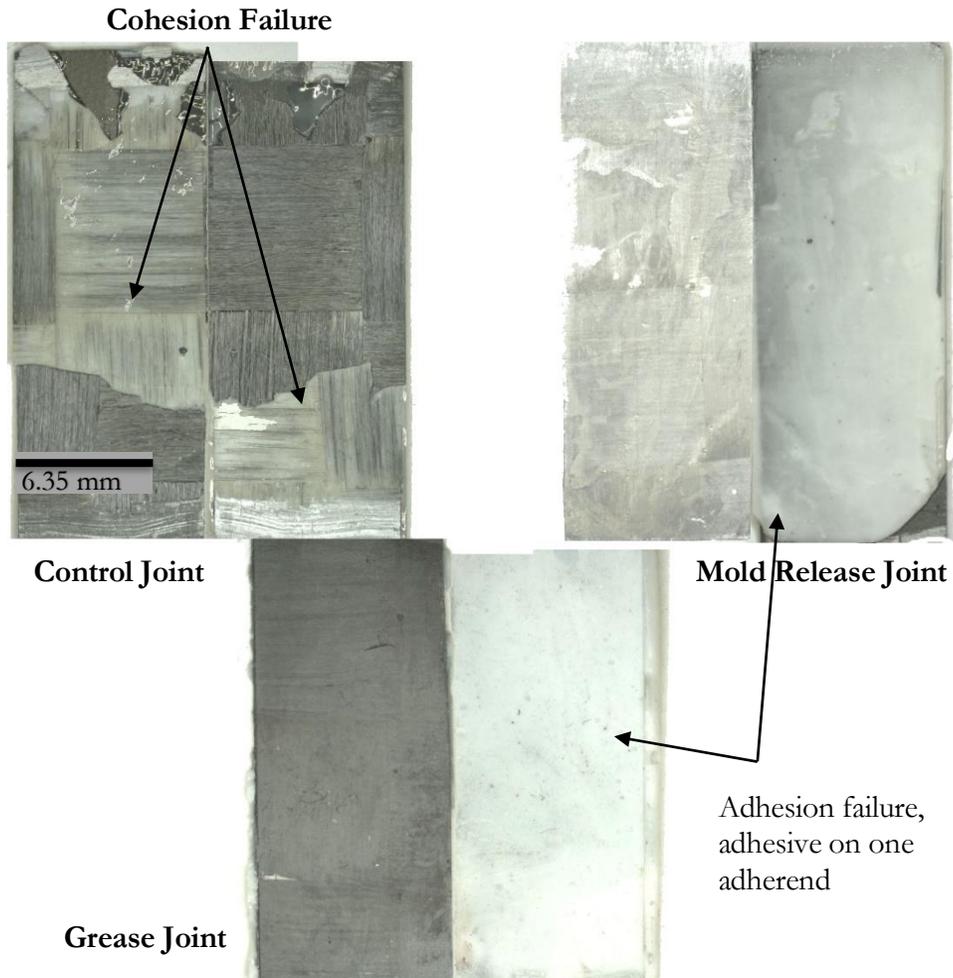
Fracture surfaces of Paste adhesive SLJ specimens
